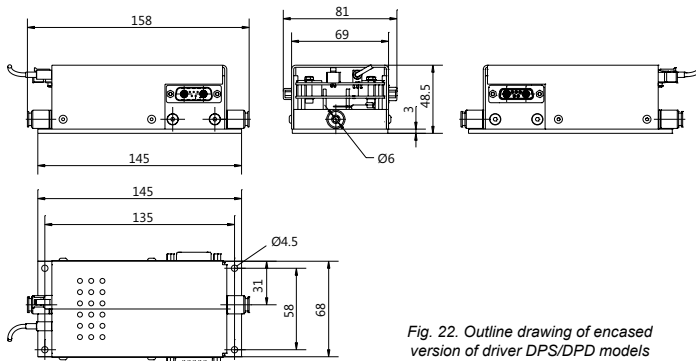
Outline drawing of encased version of driver DPS/DPD models
